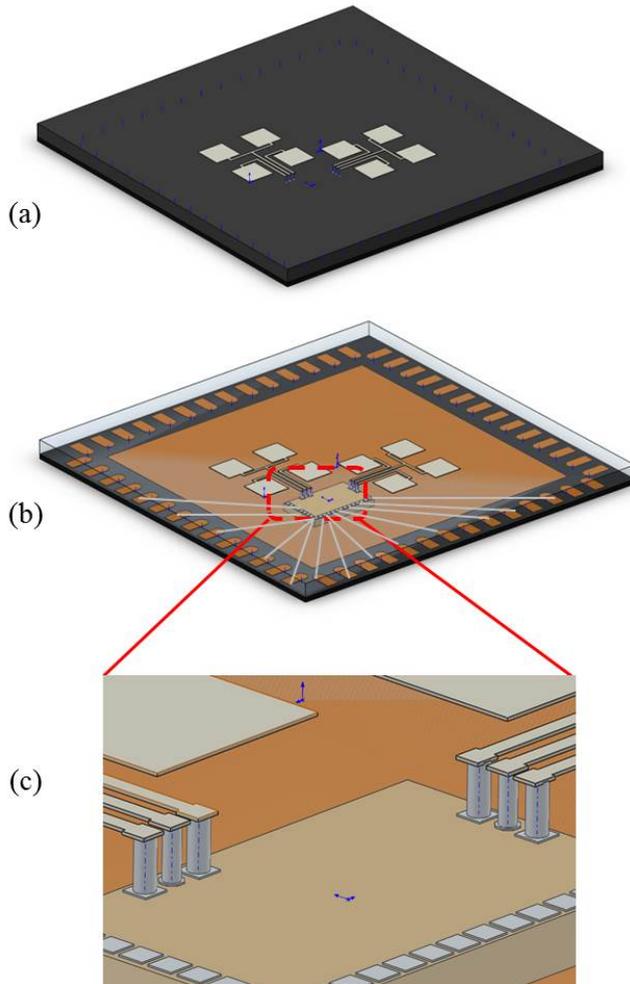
A 3D schematic of the proposed package design. (a) The overview of the package using TPVs and with antennas fabricated on the epoxy molding compound, (b) the black epoxy molding compound shown transparent to view the TPVs, the DC wire bonds and the radar IC, (c) the zoomed-in view of TPVs connecting IC and the antenna feeding lines. The schematic shown is not to scale.
